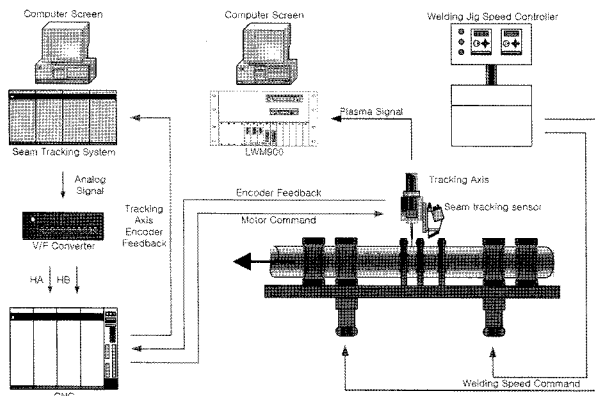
Schematic diagram for structure and control of a welding machine.
